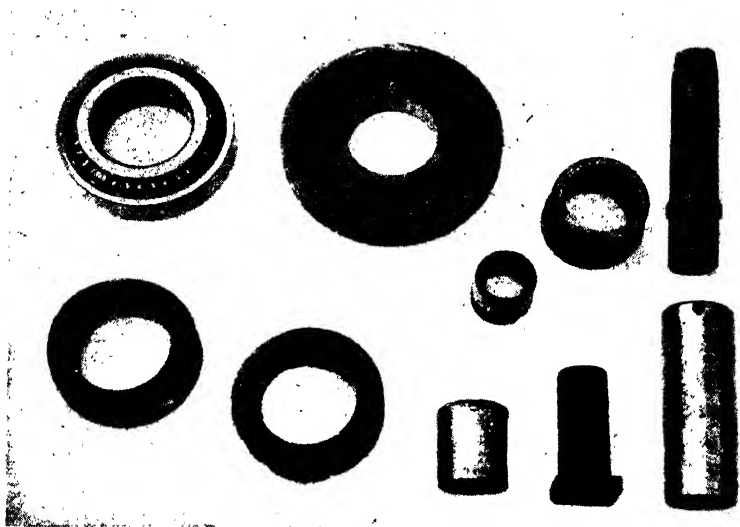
Parts such as these hard fast-operating load-carrying parts of a machine should not be welded upon. To weld on them would only stress parts of them and pull them out of shape or weaken them by softening them at the welds. (Courtesy of R. G. LeTourneau, Inc.)
